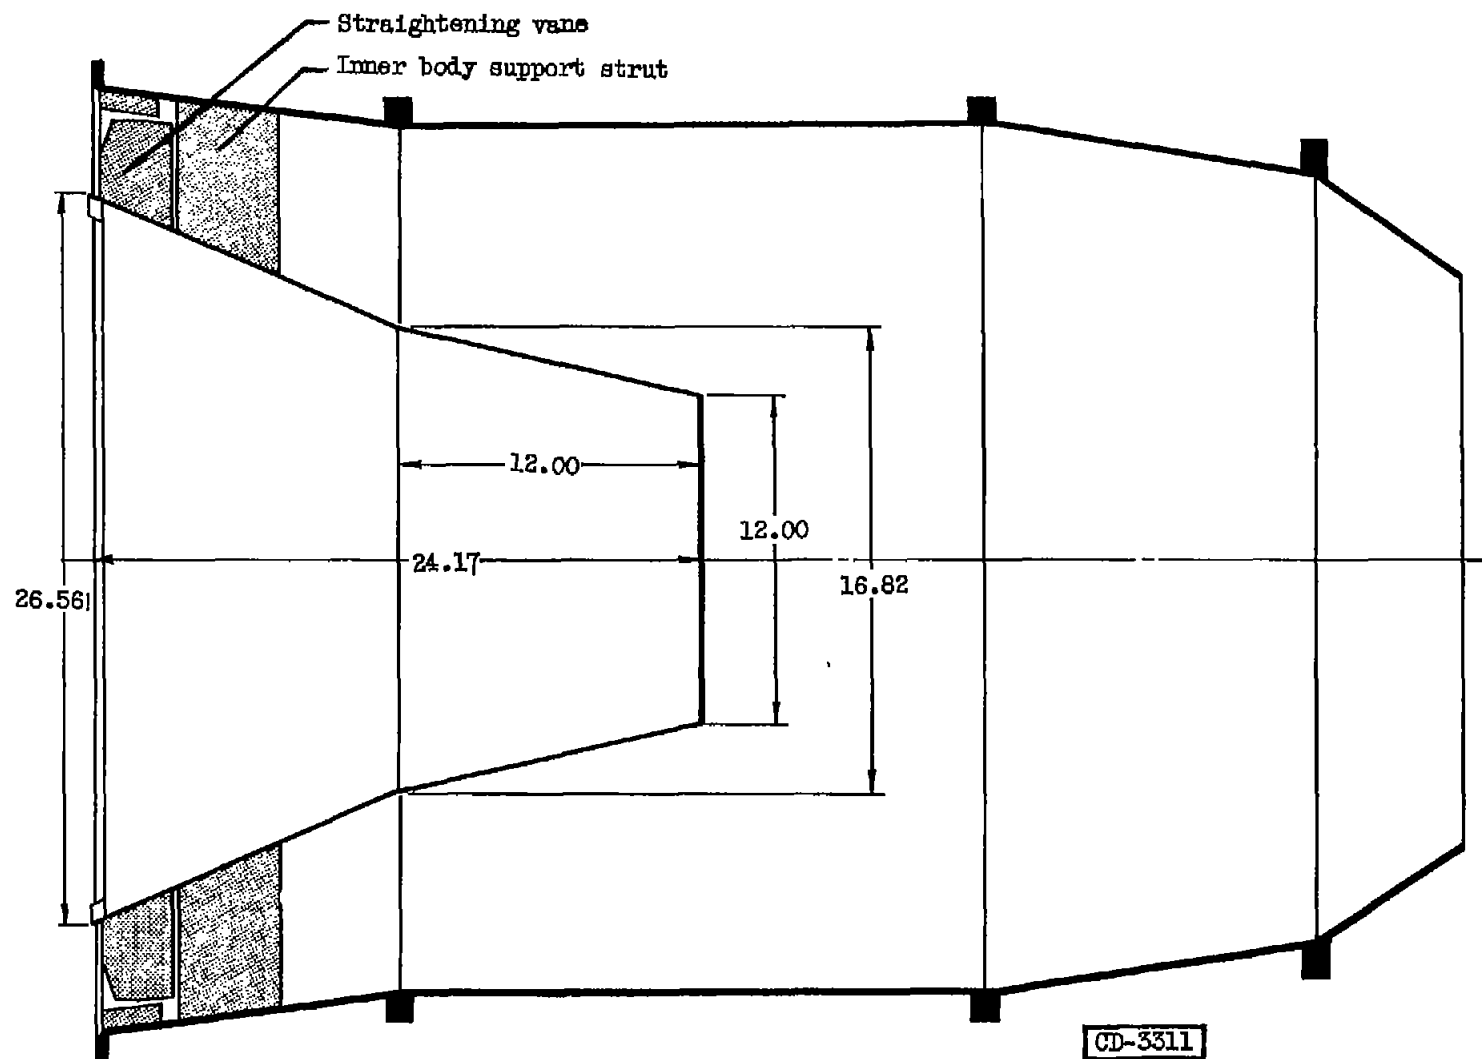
24-Inch inner body with straightening vanes. (All dimensions are in inches.)
